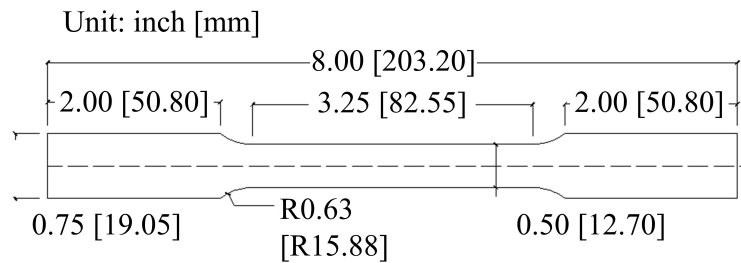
Nominal dimensional tensile coupon test specimen.
